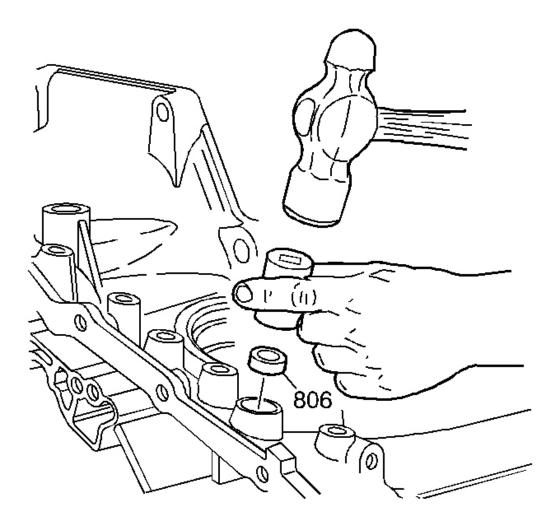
Installing Manual Shift Shaft Seal Assembly
